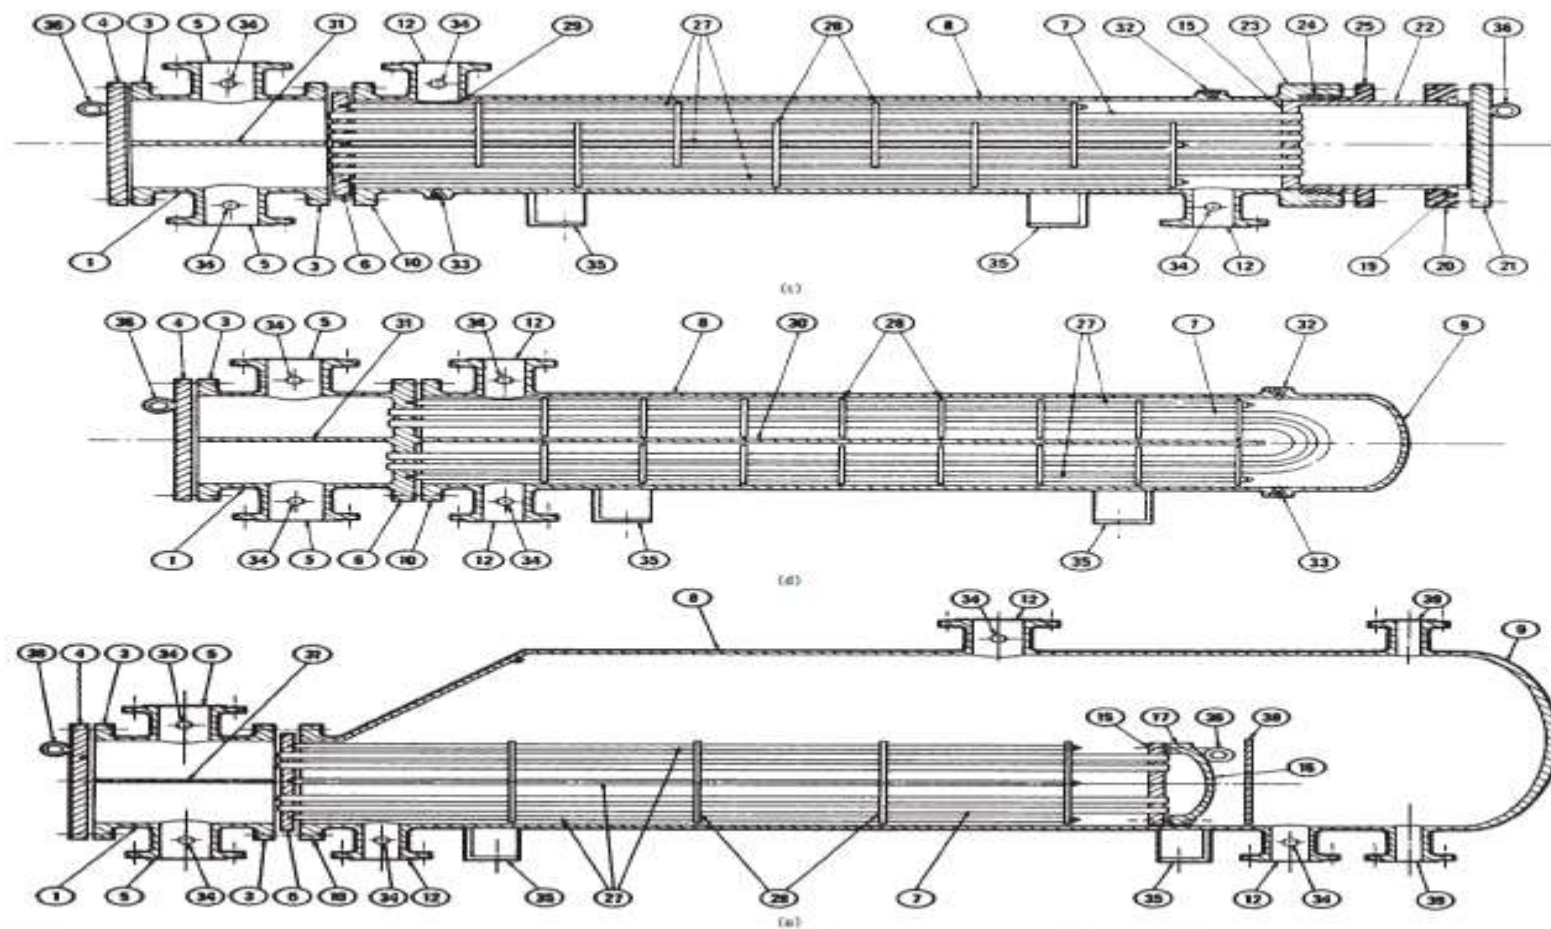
(Continued) Heat-exchanger component nomenclature. (c) Outside-packed floating-head exchanger, Type AKP. (d) U-tube heat exchanger, Type CPTU. (e) Kettle-type floating-head exchanger, Type AKT. (Standard of Tubular Exchanger Manufacturers Association, 6th ed., 1978.)
